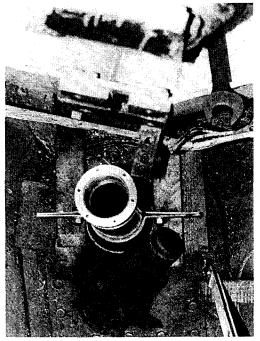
VIEW THROUGH HOLE IN DECK OF CBM's STORE WITH FAILED LIFTING SCREW REMOVED
